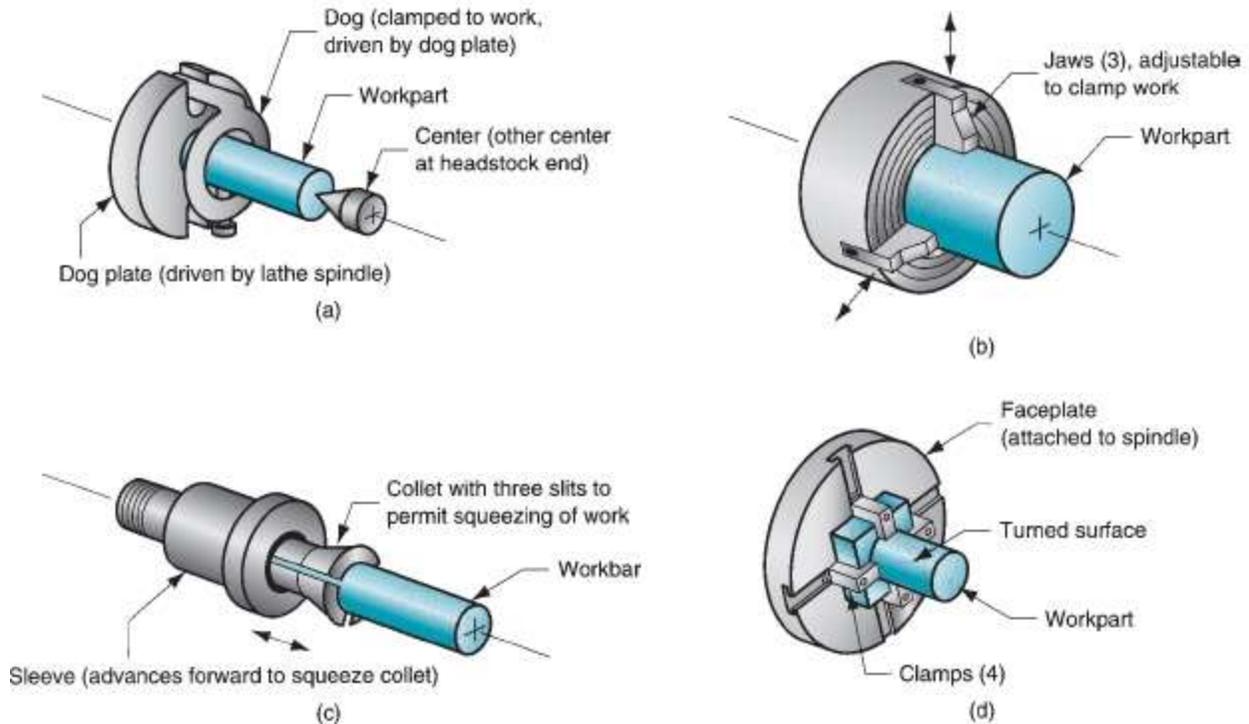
Four workholding methods used in lathes: (a) mounting the work between centers using a dog, (b) three-jaw chuck, (c) collet, and (d) faceplate for non-cylindrical workparts.
